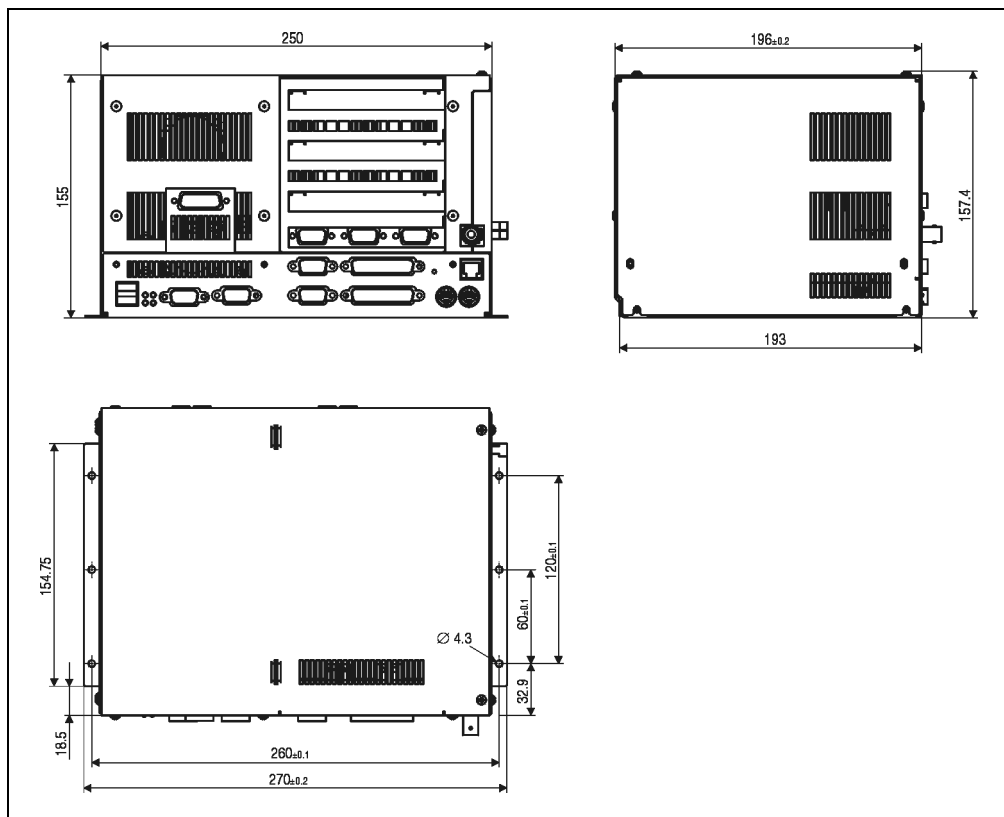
IPC5000 and IPC5000C dimensions (4 slot design)
